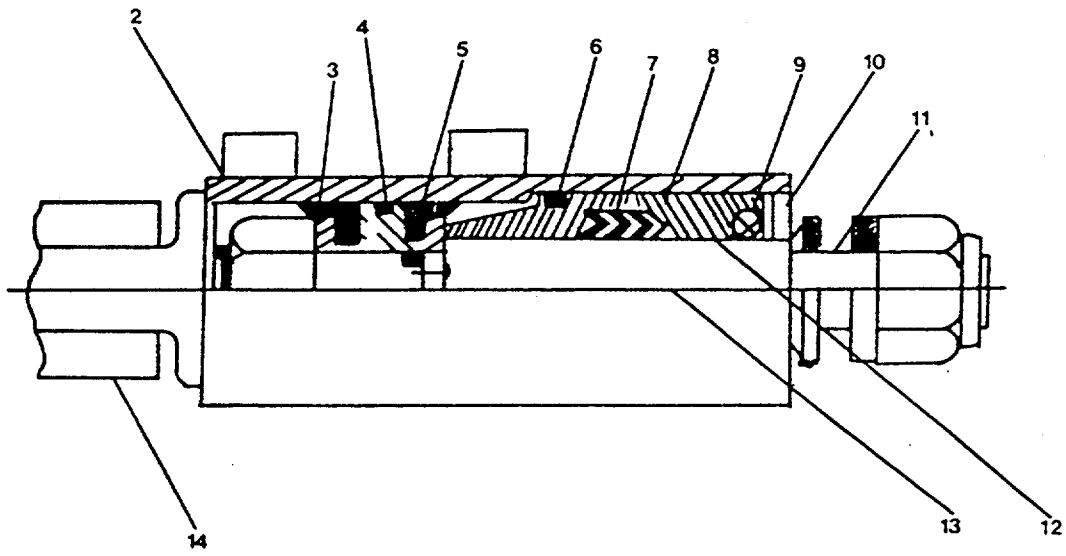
A CYLINDER HYDRAULIC B-WK-406-C-1-8
